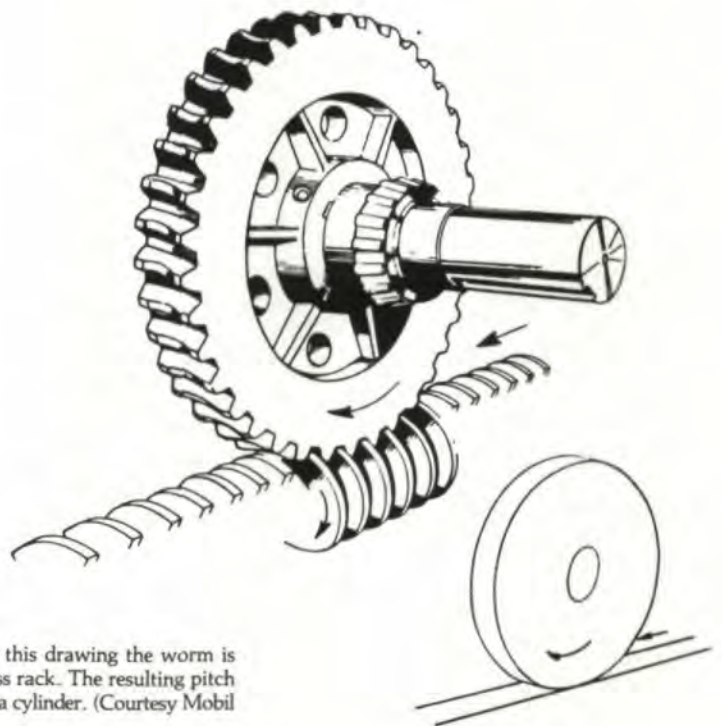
Worm gear. In this drawing the worm is represented as an endless rack. The resulting pitch surfaces are a plane and a cylinder. (Courtesy Mobil Oil Corporation.)
